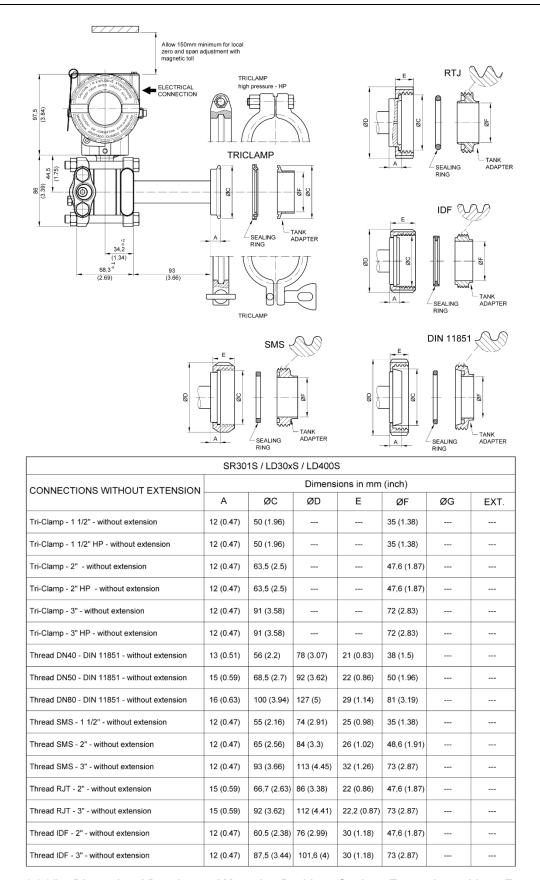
(d) – Dimensional Drawing and Mounting Position - Sanitary Transmitter without Extension
